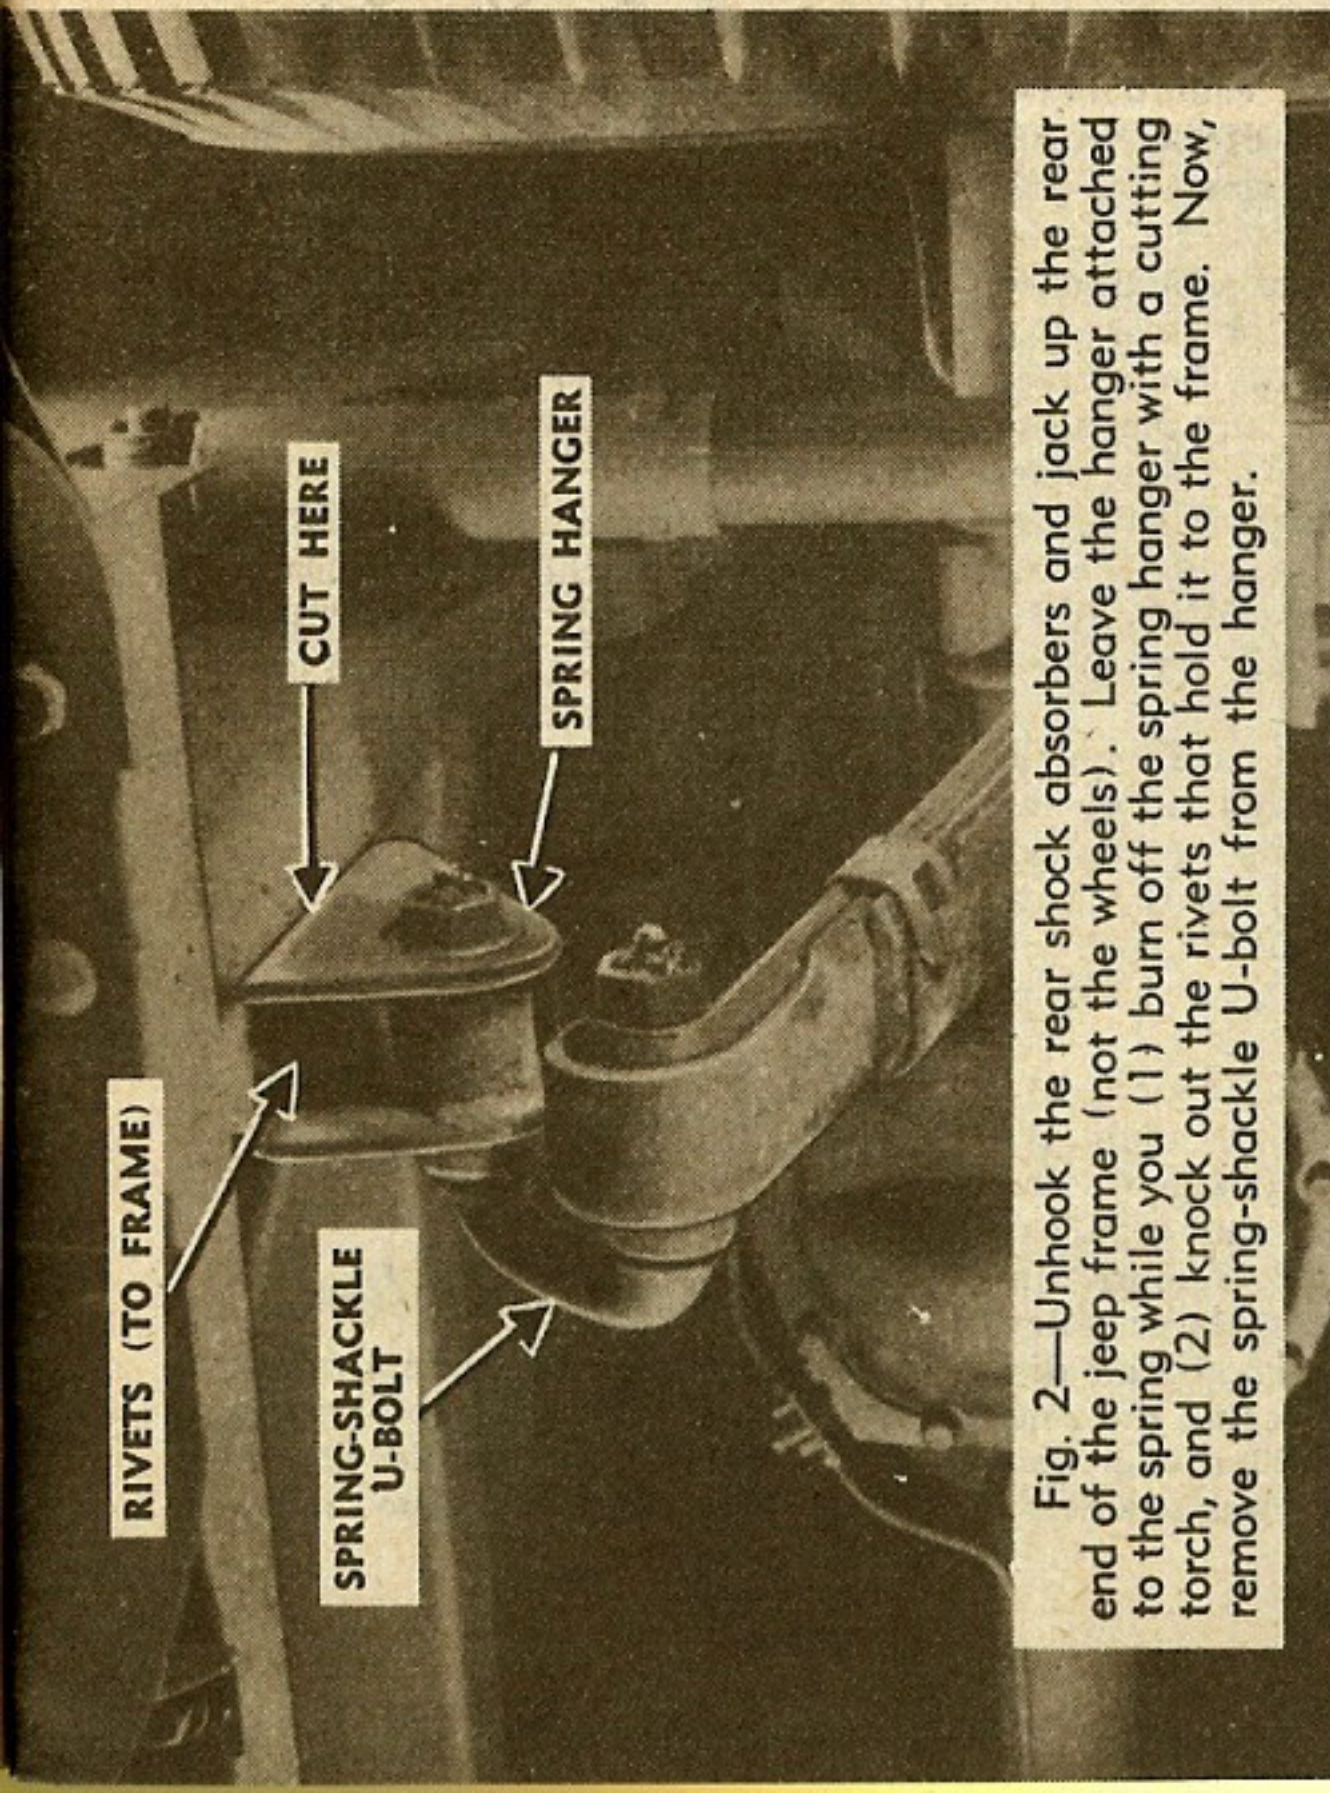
Unhook the rear shock absorbers and jack up the rear end of the jeep frame (not the wheels). Leave the hanger attached to the spring while you (1) burn off the spring hanger with a cutting torch, and (2) knock out the rivets that hold it to the frame. Now, remove the spring-shackle U-bolt from the hanger.
